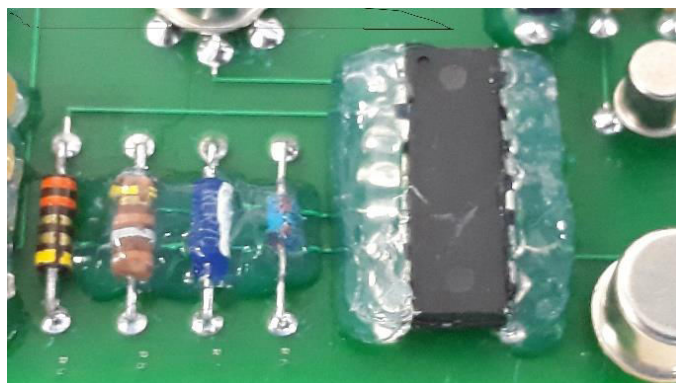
Components potted with Dowsil 6-1104 CV sealant on thermount polyimide Printed Circuit Board
